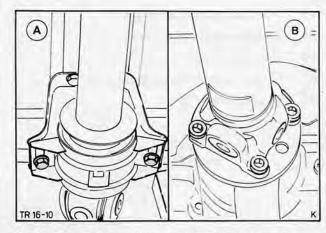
Driveshaft mounting – rear axle flange and centre bearing
